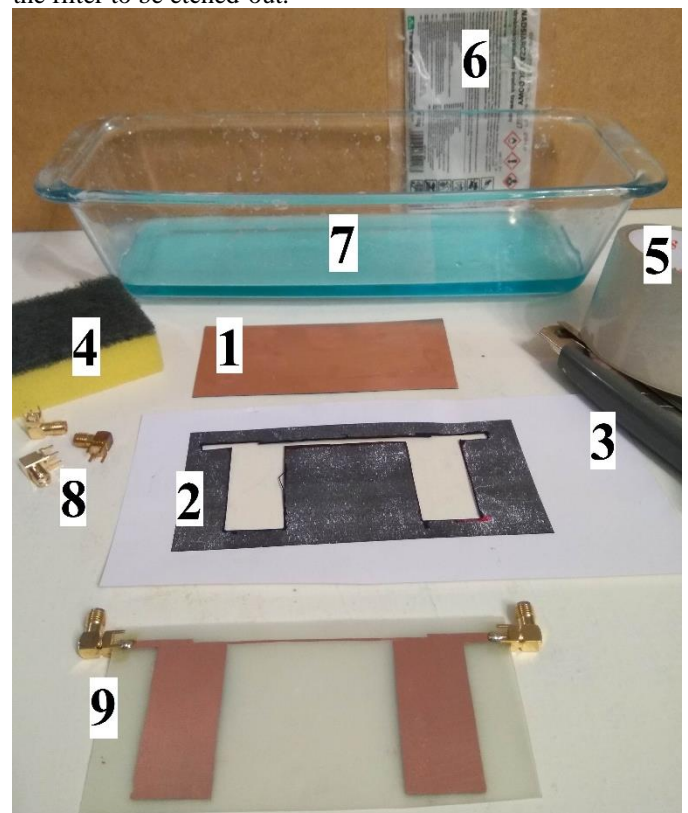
Items needed for the fabrication of the filter; 1-Initial PCB; 2-Cardboard mask; 3-macket knife; 4-kitchen sponge; 5-scotch tape; 6-sodium persulfate powder; 7- sodium persulfate solution; 8-SMA coaxial connectors; 9-the fabricated filter.
